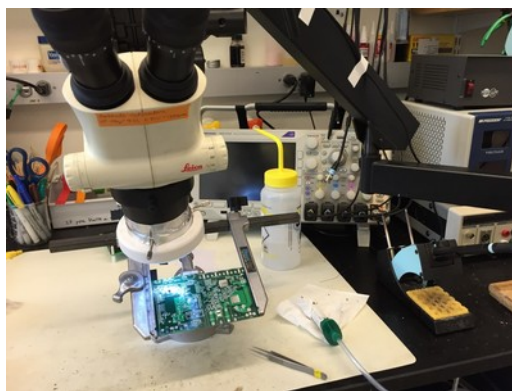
Instead of populating components on a table, holding the PCB using a PanaVise can be helpful.
